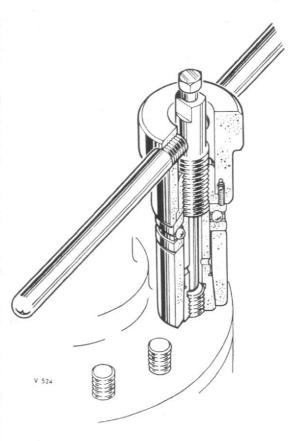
Sectioned view of stud extractor T.78154 showing method of attachment to a stud in the impeller.
